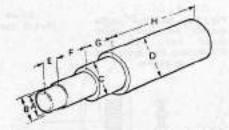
When installing Borg and Beck clutch use a pilot shell made to dimensions shown.
